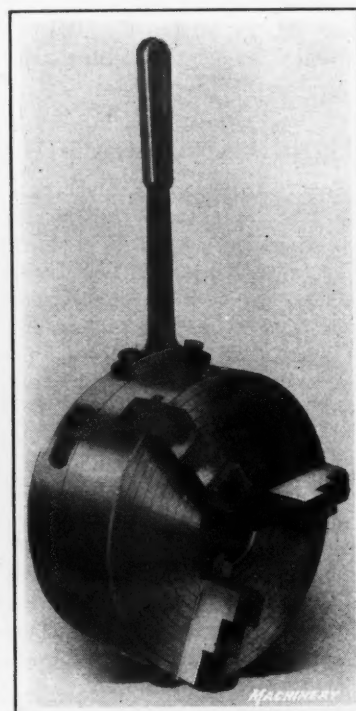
Barker Wrenchless Chuck manufactured by the Foster Machine Co.
